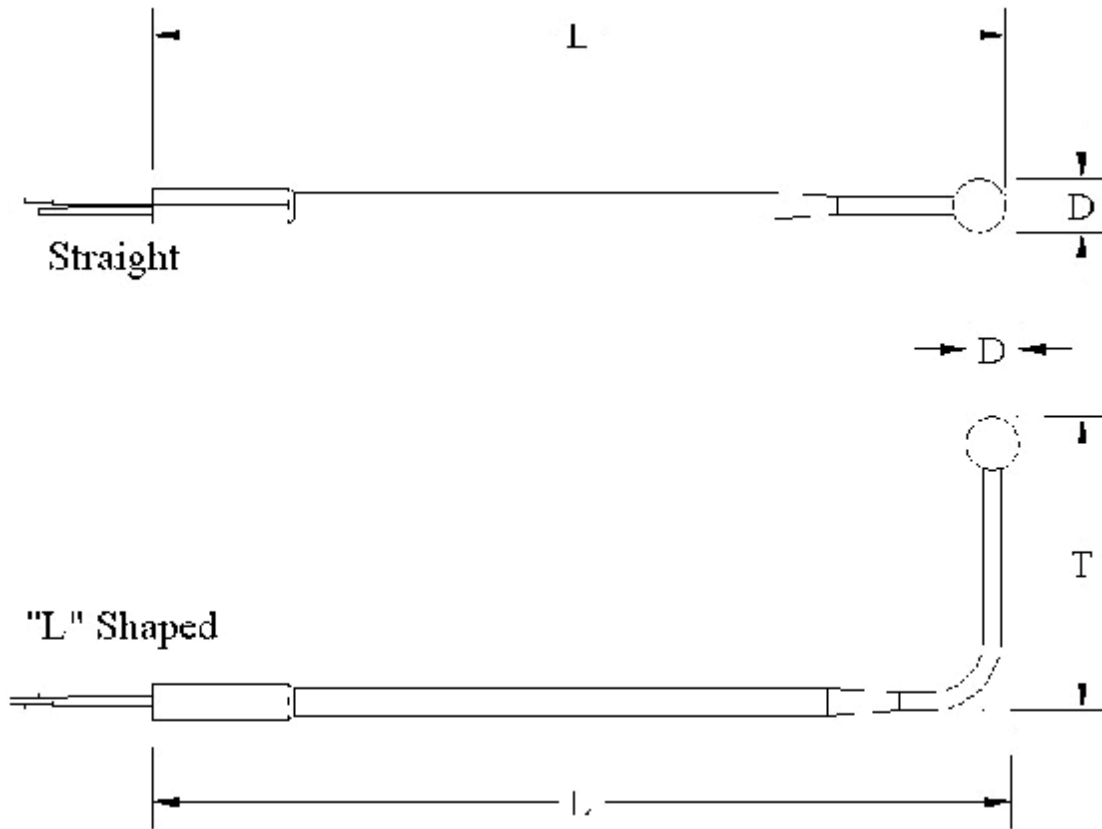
(b): Standard L-Shaped Omniprobe. All Dimensions in Millimeters
